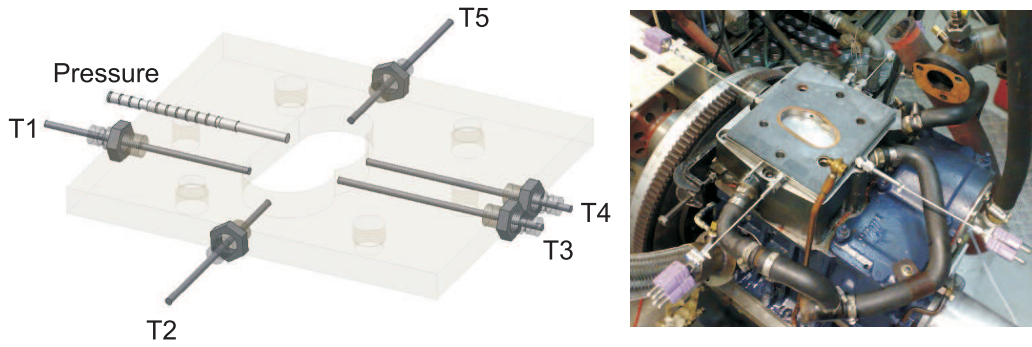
Elongation piece with combustion chamber, heat flux sensors and pressure transducer housing: (a) Final design, (b) Final constructed piece.
